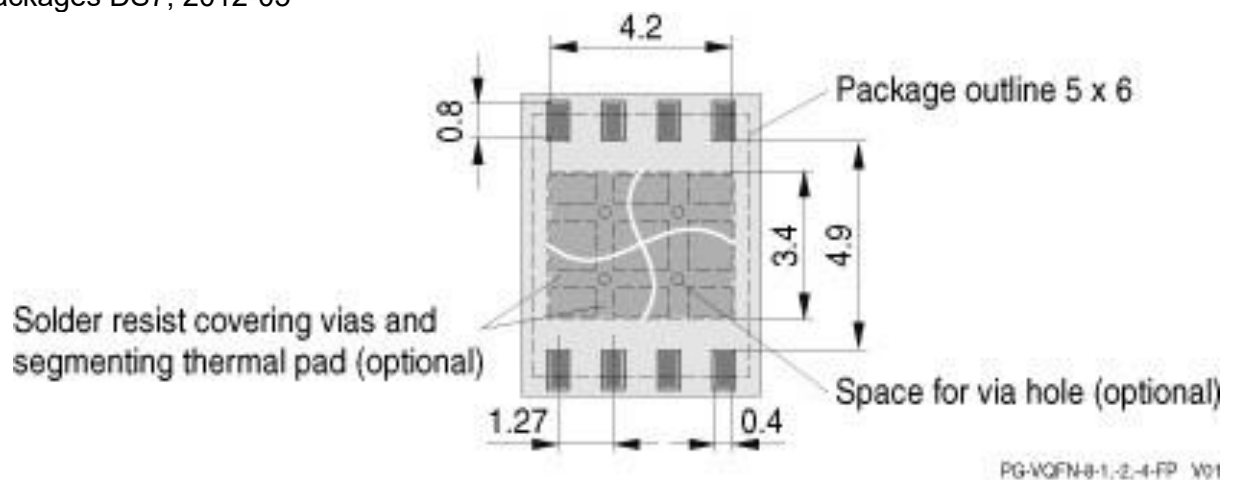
MFF2 package footprint drawing (Source: IFX Package Ove
